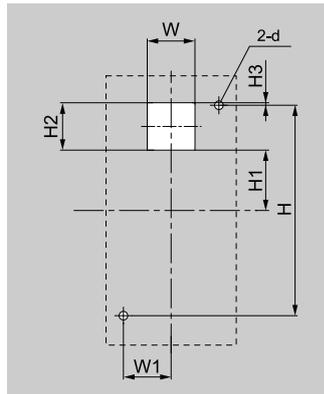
Panel Cut-Out Dimensions to Attach Outside of Control Panel
